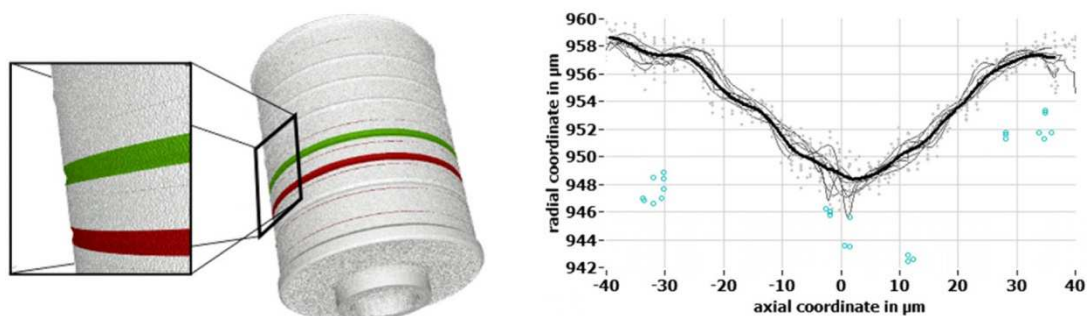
Reference sample incorporating grooves and flanges enabling the measurement of MSR (left). Extracted surface points in cylinder coordinates (right). [91]
